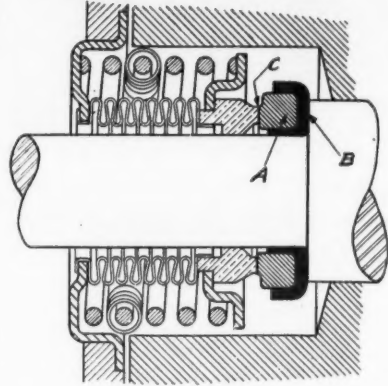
illustrates construction of bronze ring bellows shaft seal.
